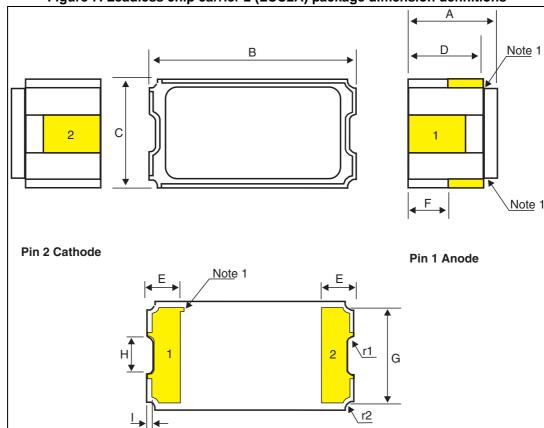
Leadless chip carrier 2 (LCC2A) package dimension definitions
